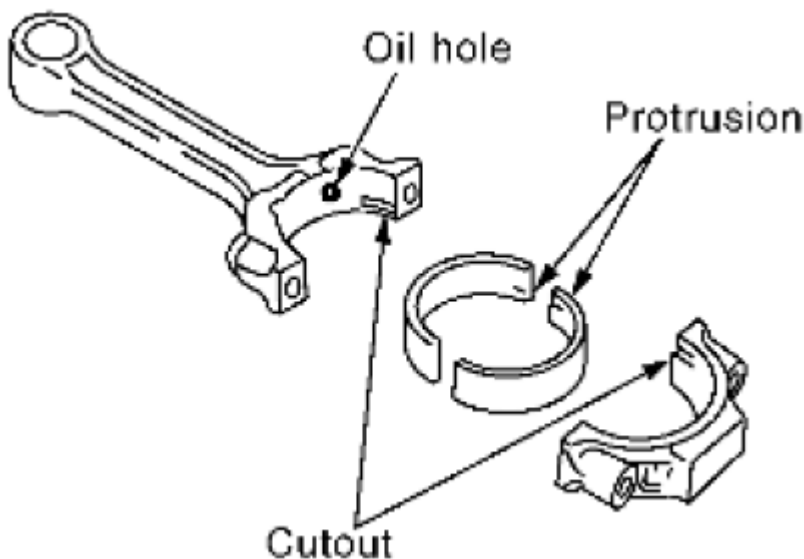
Identifying Connecting Rods And Connecting Rod Bearing Caps
